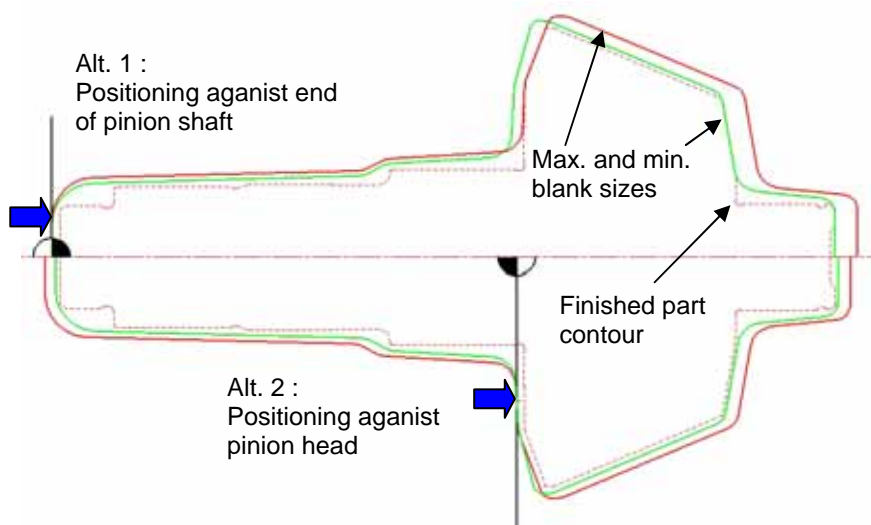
Different blank sizes and positioning points affect machining allowances. The topmost half of the drawing shows alternative 1 and the lower half shows alternative 2.
